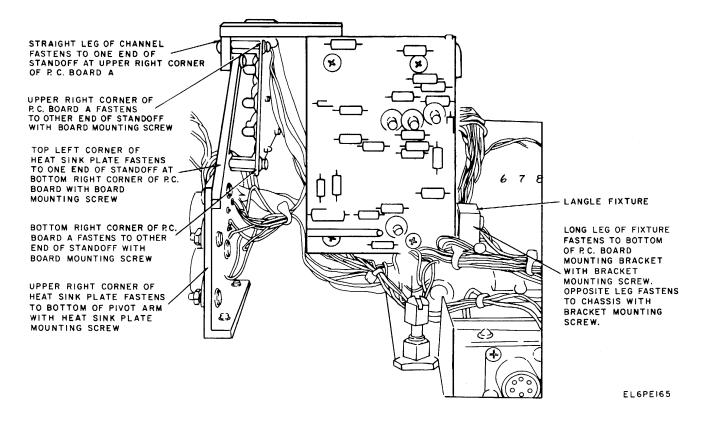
Alarm Monitor Power Supply, Disassembled View Showing Typical Use of Support Fixtures (Sheet 2 of 2).
